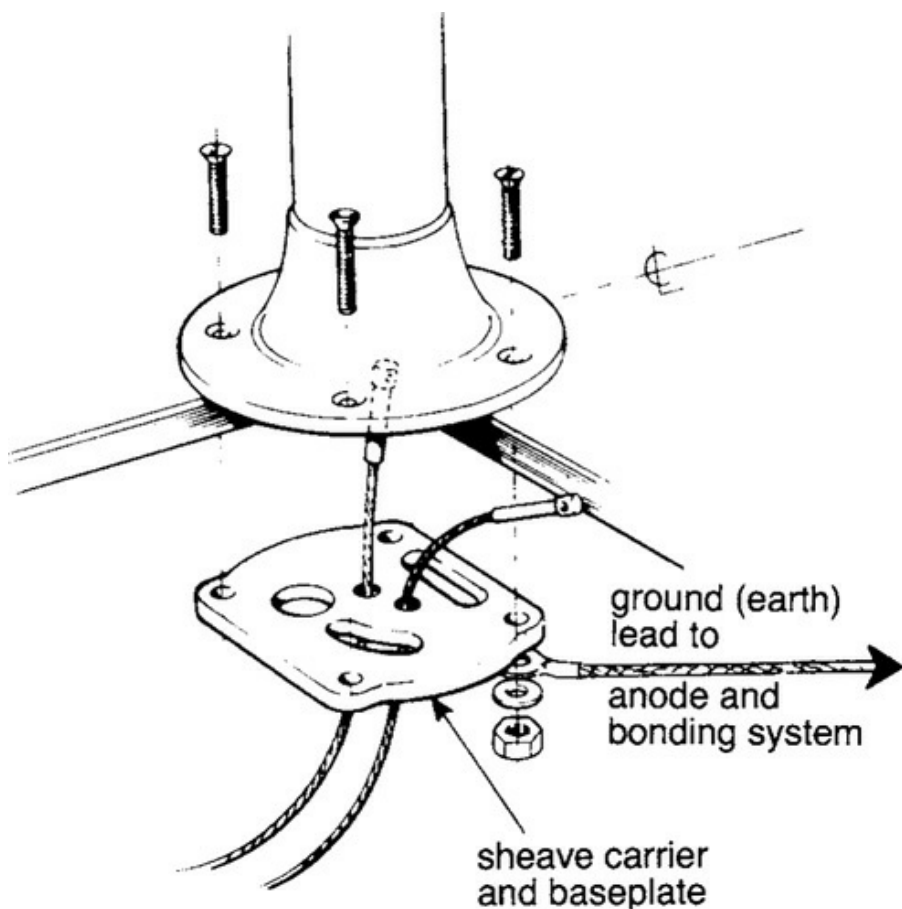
An exploded view of an open-cable pedestal steerer.
